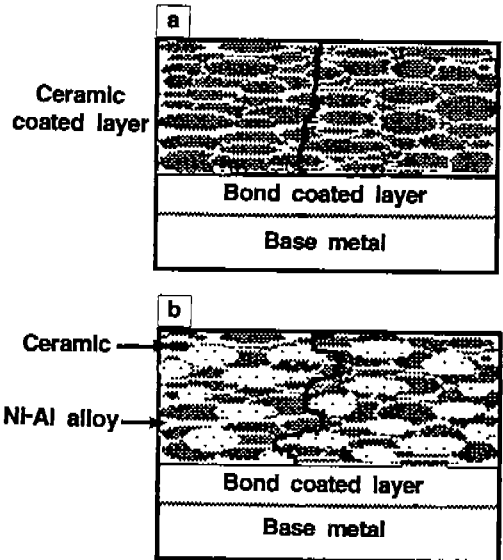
Schematic illustration of crack processing. (a : ceramic coating layer, b : composite coating layer)
